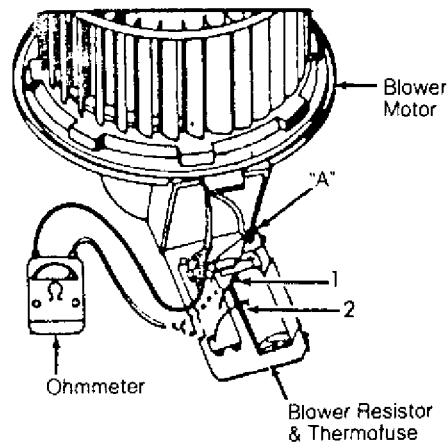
Testing Blower Motor (Golf & Jetta)
